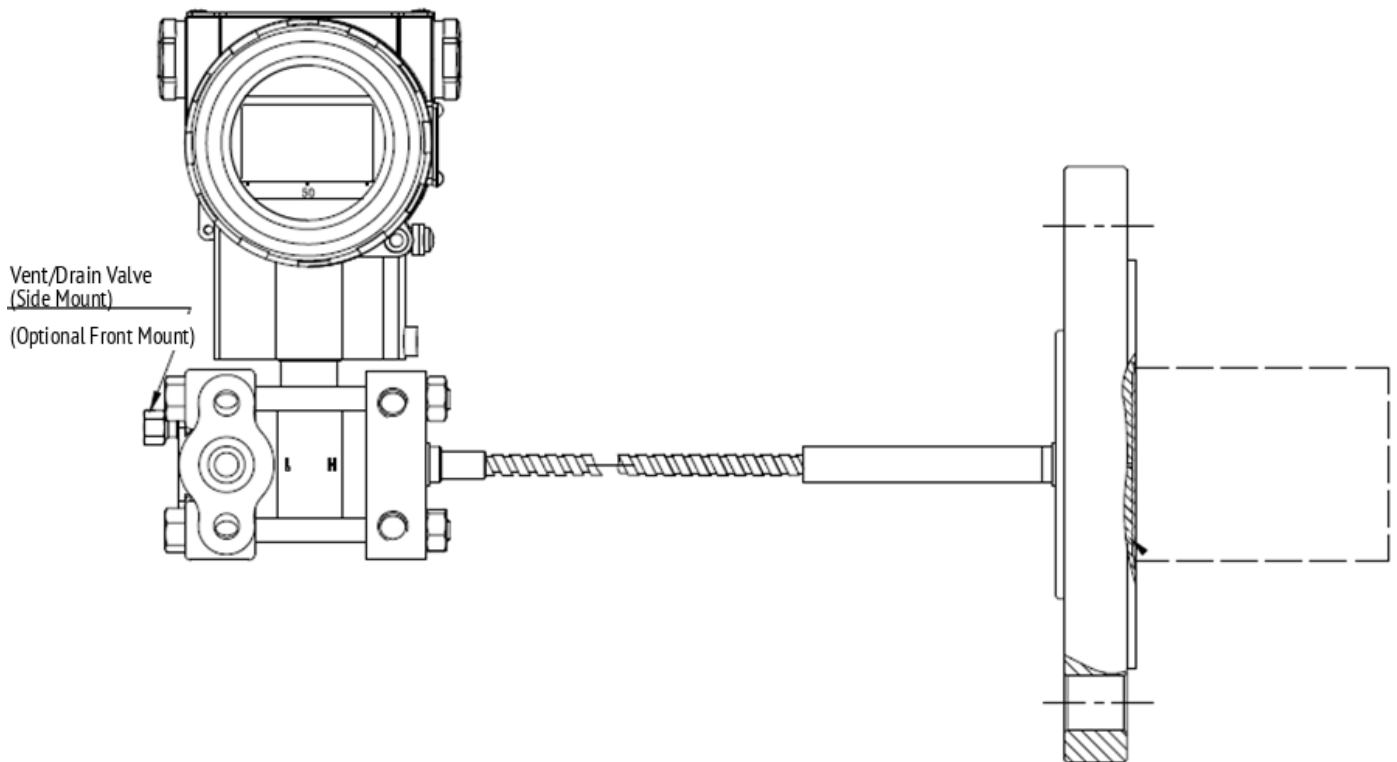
Single Remote Seal Arrangement (Flange-Mount, Basic Type) (units: mm)
